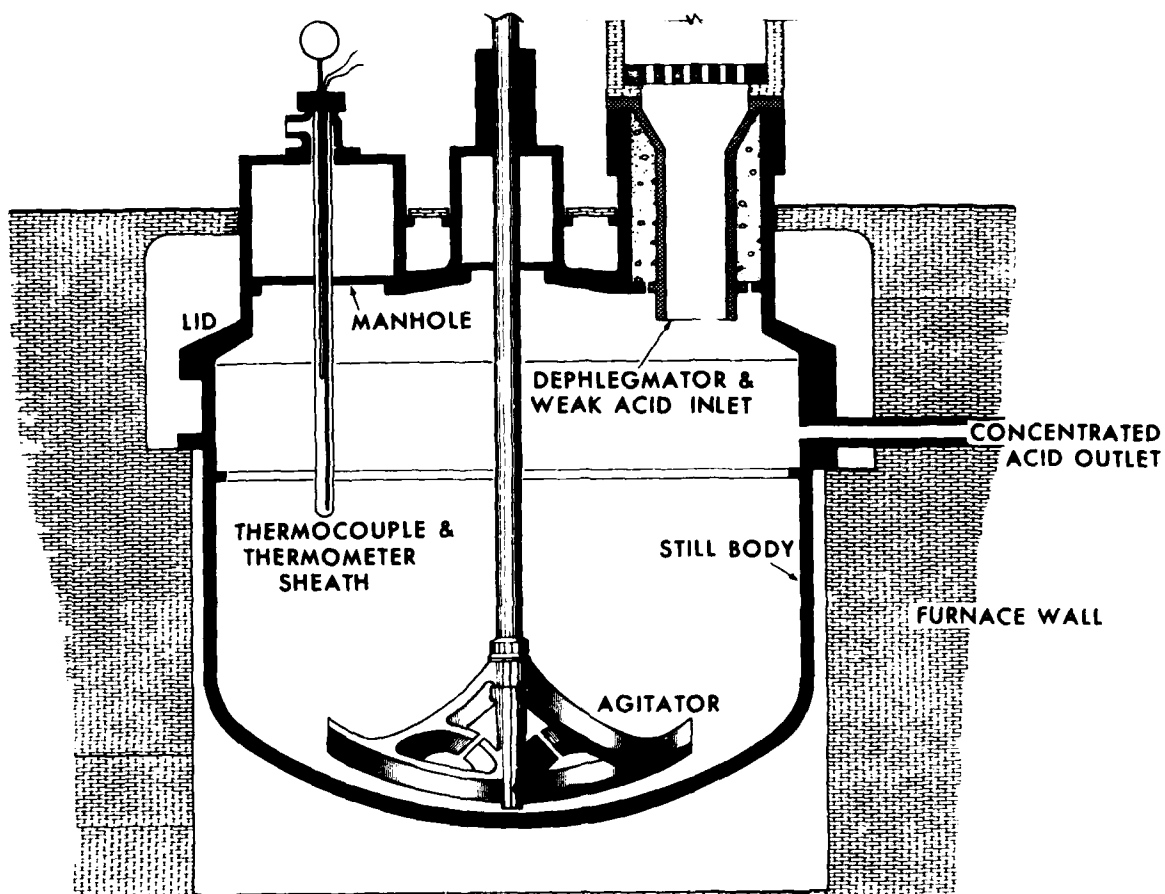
Simplified version of an engineering drawing of the sulphuric acid concentrator used at Australian Explosives Factory 'A', showing the cast iron pot, the impeller, dephlegmator, and the concentrated acid outlet.
